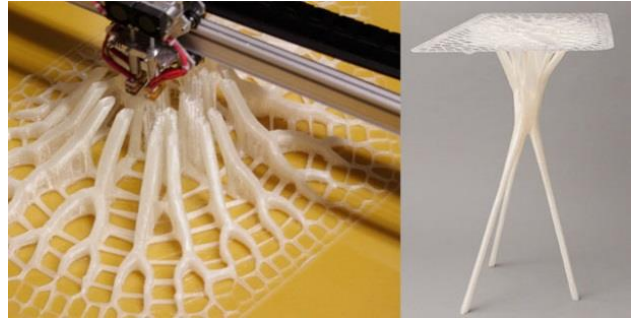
Pieces of furniture manufactured with 3D printer [8]
